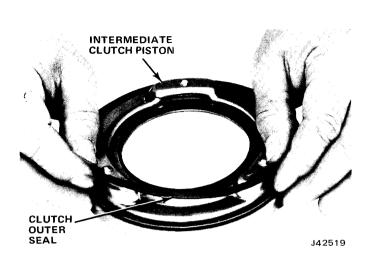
Installing Outer Seal on Intermediate Clutch Piston
